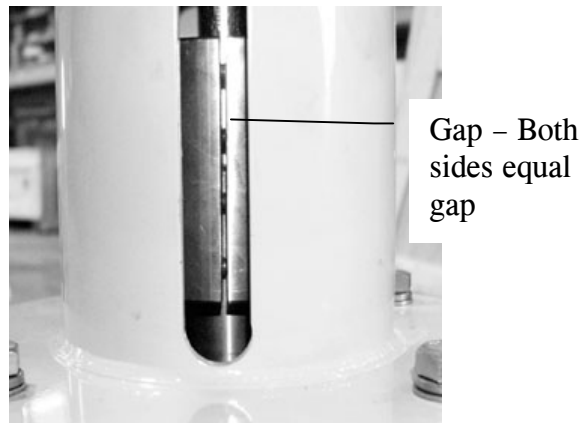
Add or Remove Fender Washer(s) or Shim Spacer(s) to Change Seal Compression
